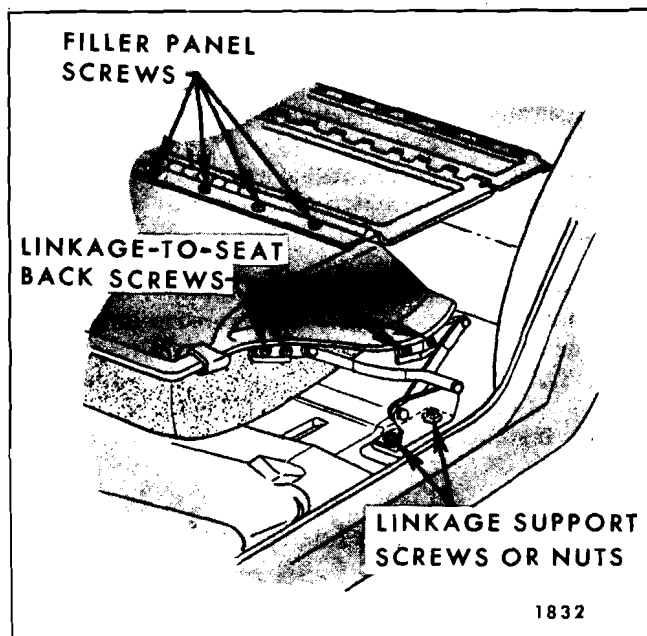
Folding Second Seat Back Linkage and Filler Panel
